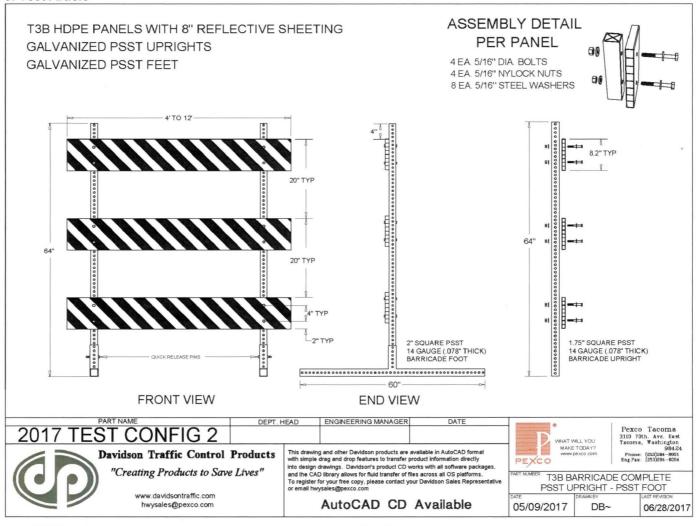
Pexco T3B Barricade with PSST Upright and Feet Technical Drawing
